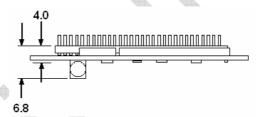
Thickness of GR64001 Wireless CPU® (including shieding can, PCB and the components on the top layer)
